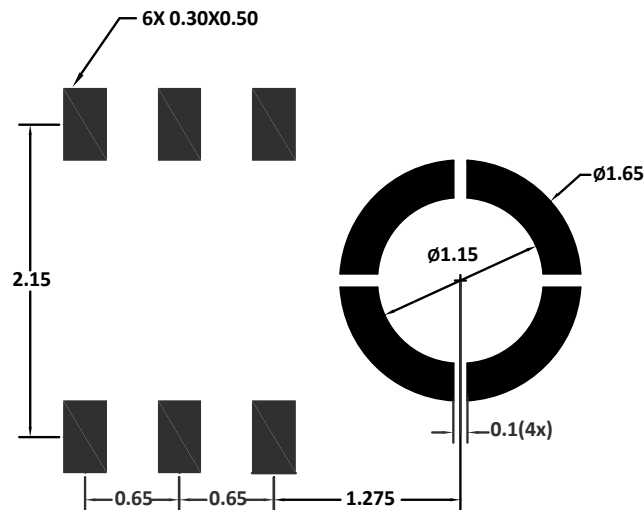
Suggested Solder Paste Stencil Pattern Layout
